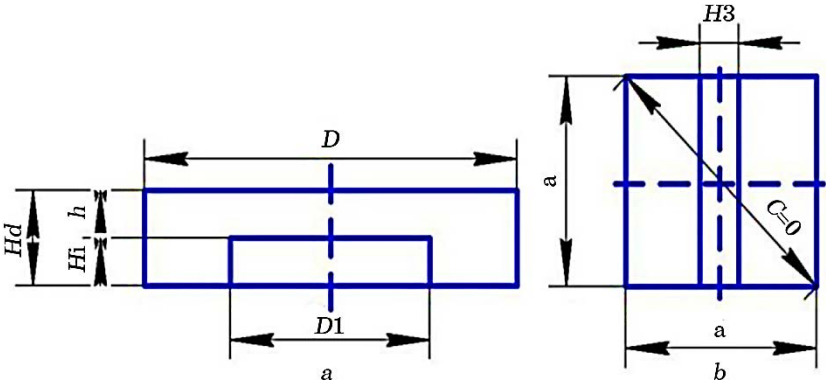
Dimensions of the finished part (a) and the initial blank (b).
